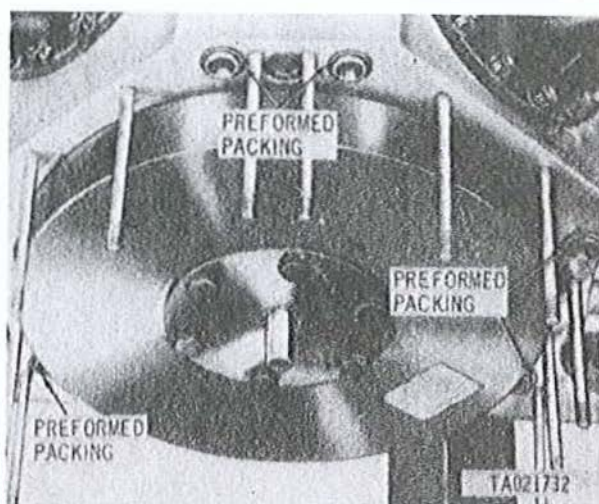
Front end of crankcase assembly showing locations of oil transfer tube preformed packings.
